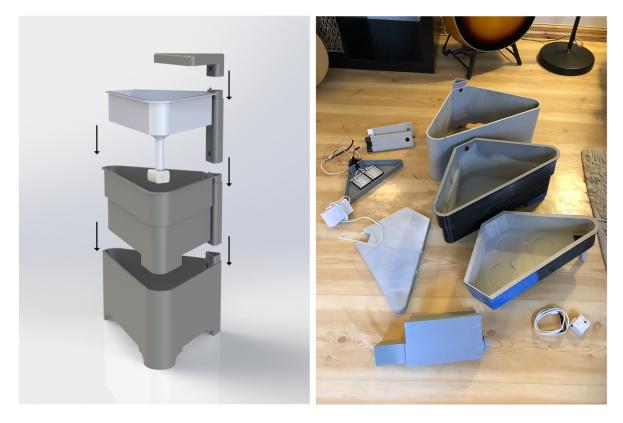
Assembly of the prototyped system. (Left: Illustration to show how the system is assembled. Right: Disassembled system how it was presented to the test subjects)
